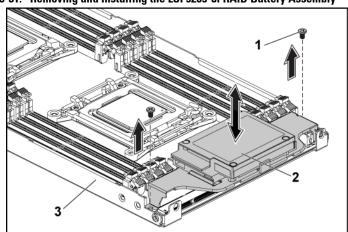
Removing and Installing the LSI 9265-8i RAID Battery Assembly
